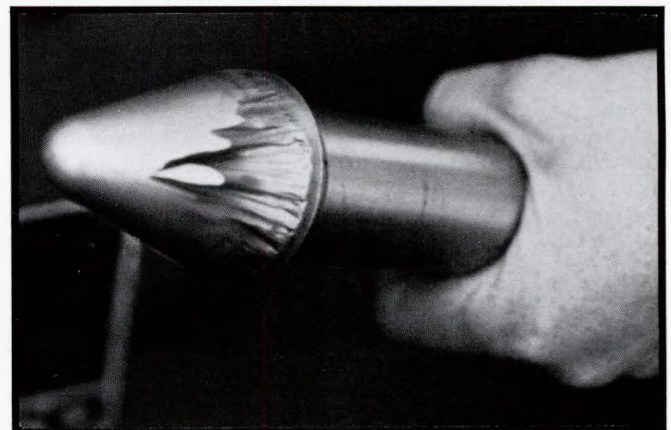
Valve plug eroded after short exposure to sand-bearing fluids
